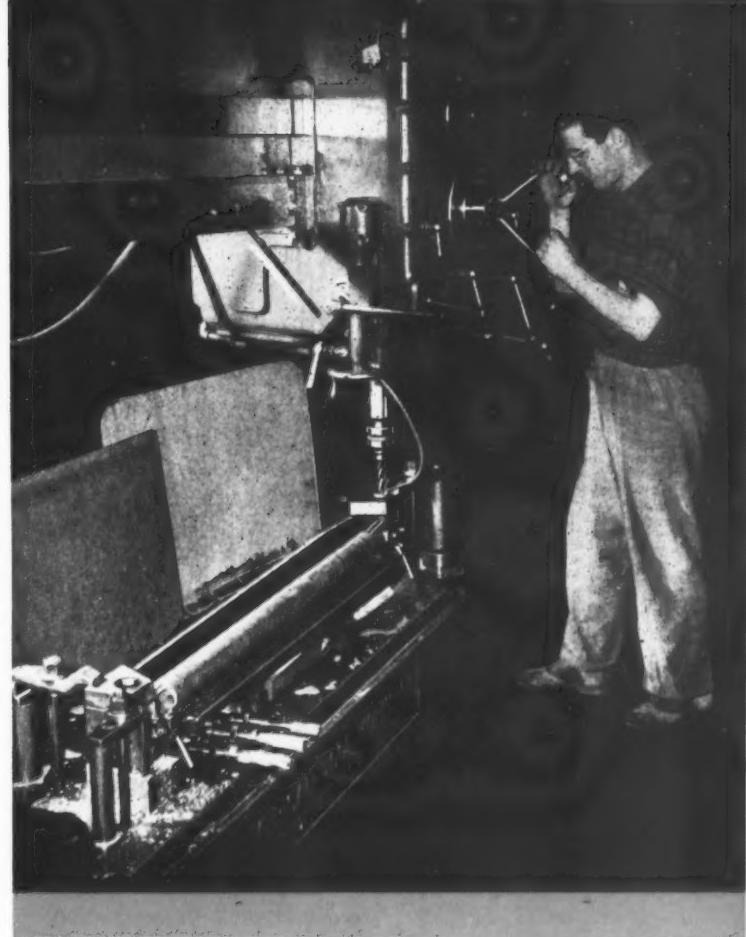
Forged Fittings in the Ends of Landing-gear Struts are Drilled Accurately as to Center Distance by Employing a Fixture Set Up on a Radial Drill
